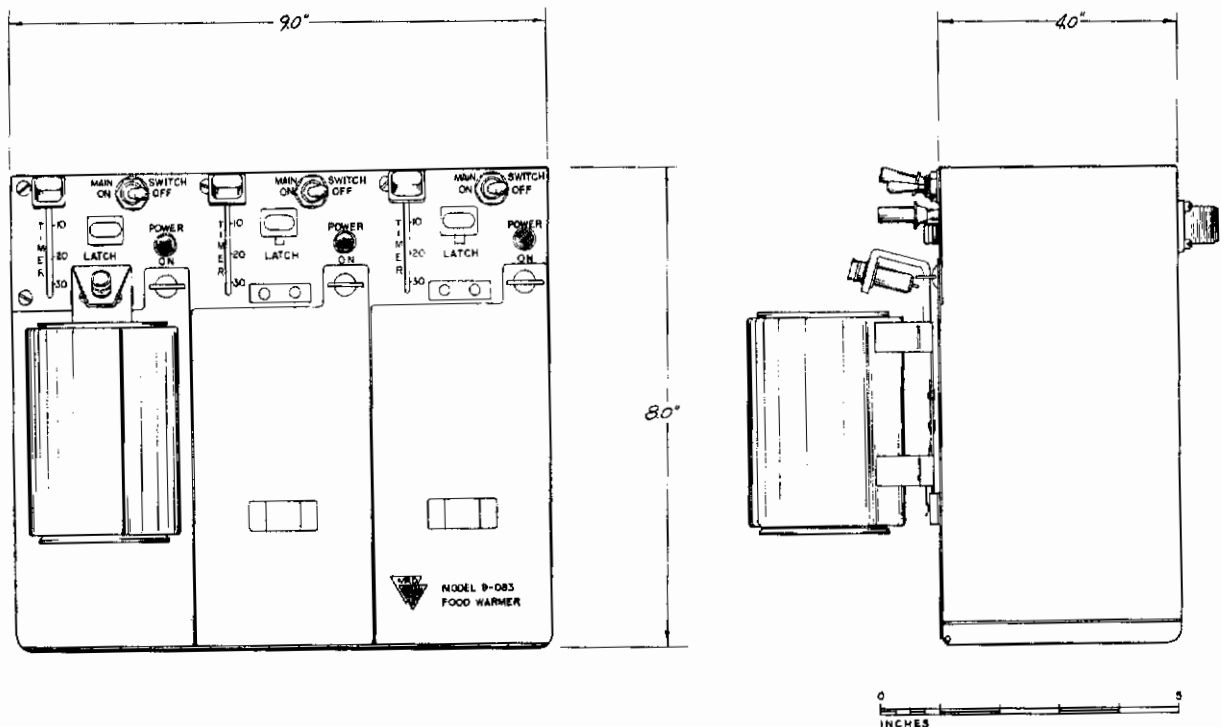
DRAWING OF FULL-SCALE ENGINEERING MODEL
